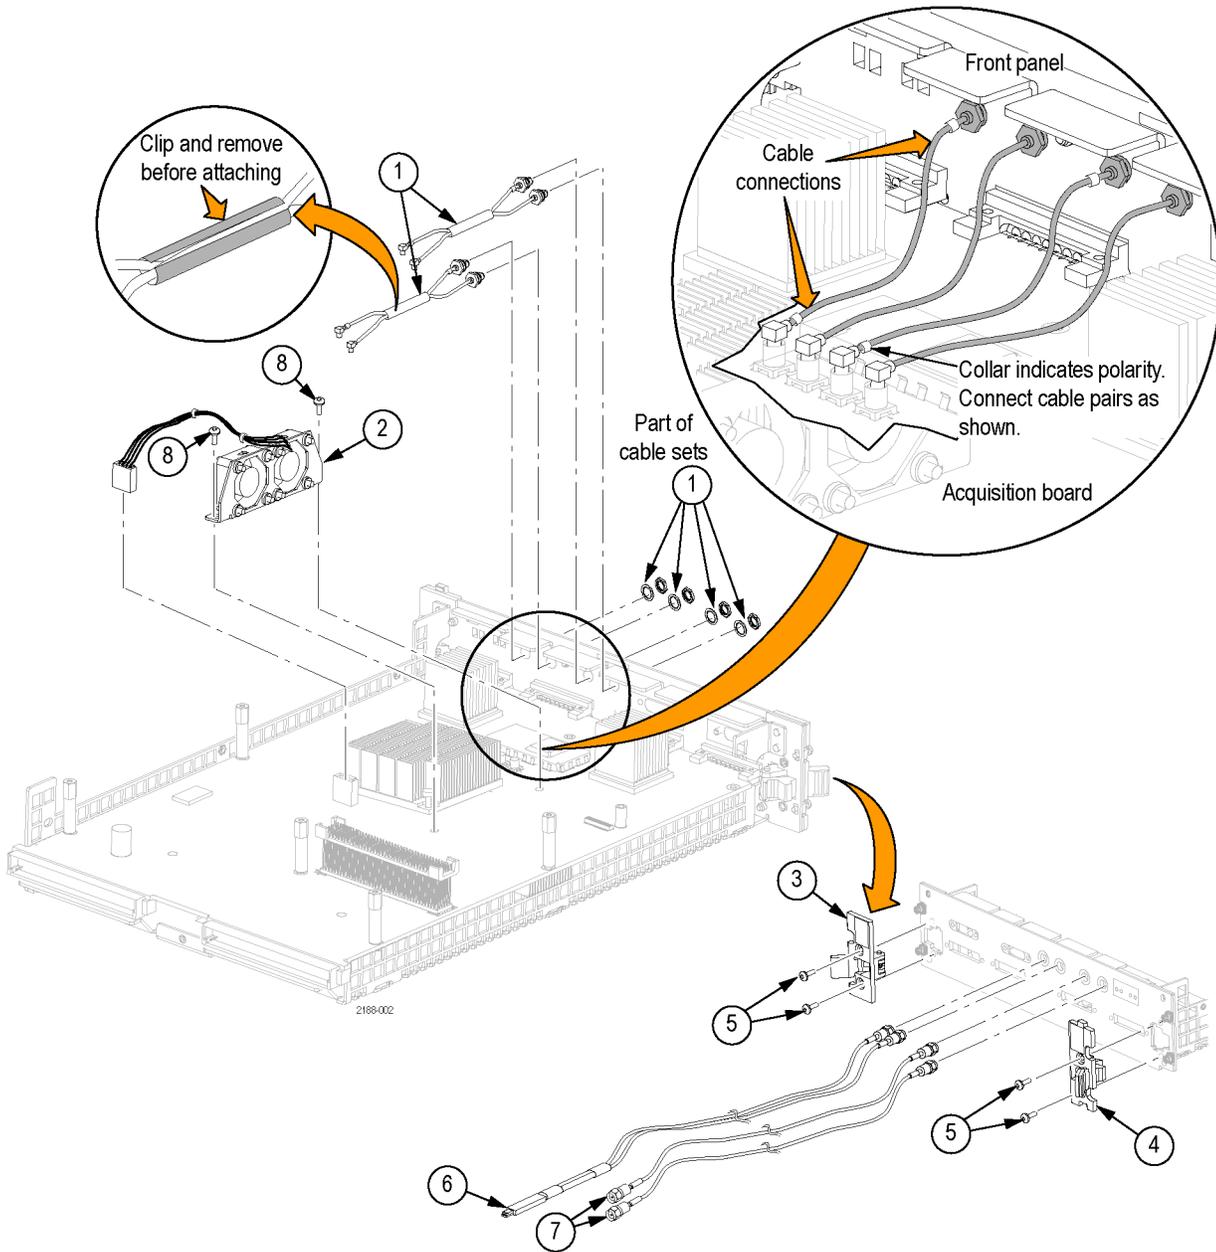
TLA7S08 & TLA7S16 internal cables and connectors
